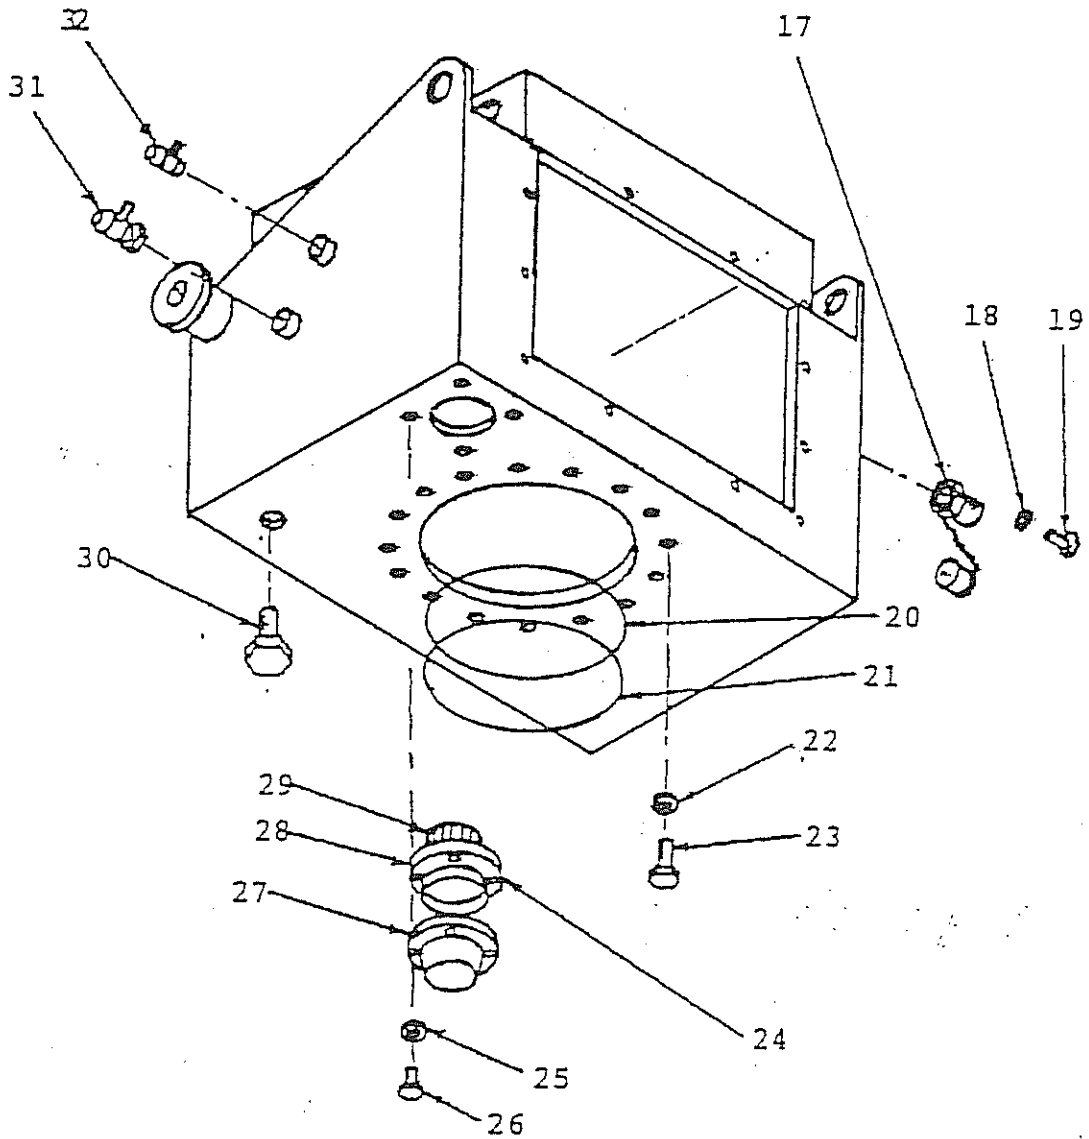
(2 of 3). Upper Outdrive Housing Assembly
